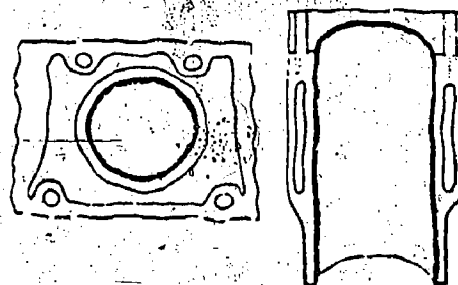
Exaggerated illustration of cylinder distortion caused by unequal or excessive tightening of cylinder head bolts.
